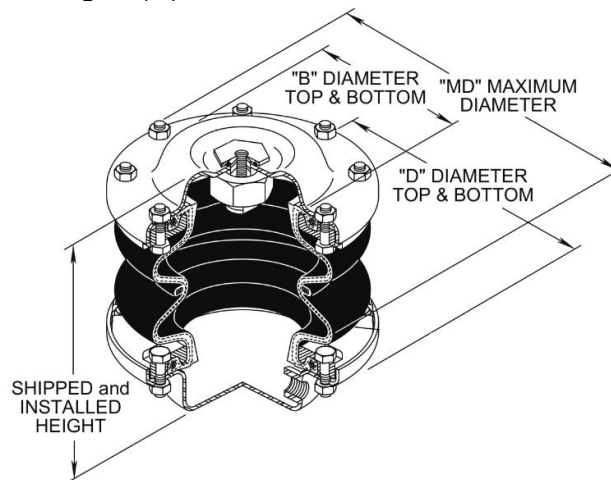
cut through of typical air spring (Mason Industries type MT)
